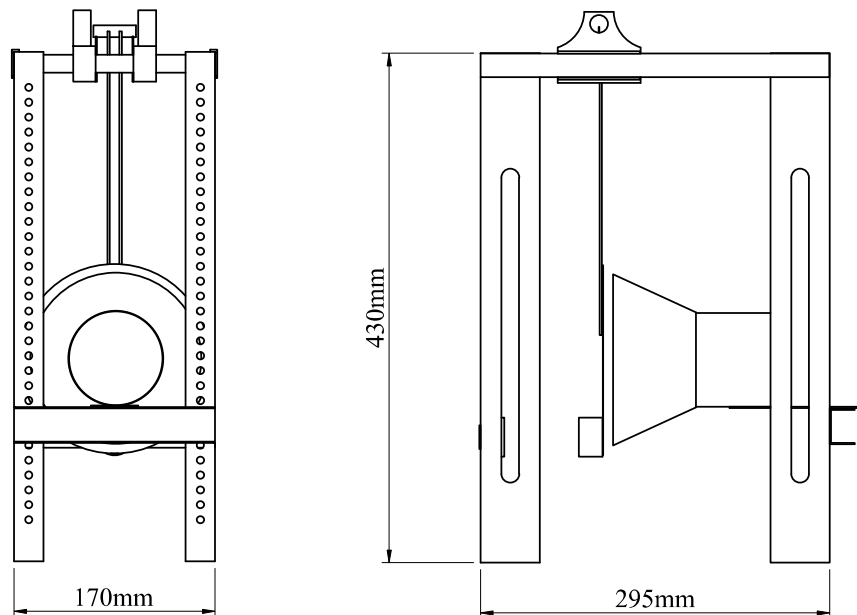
Side view and front view of the pendulum-based thrust stand with dimensions.
